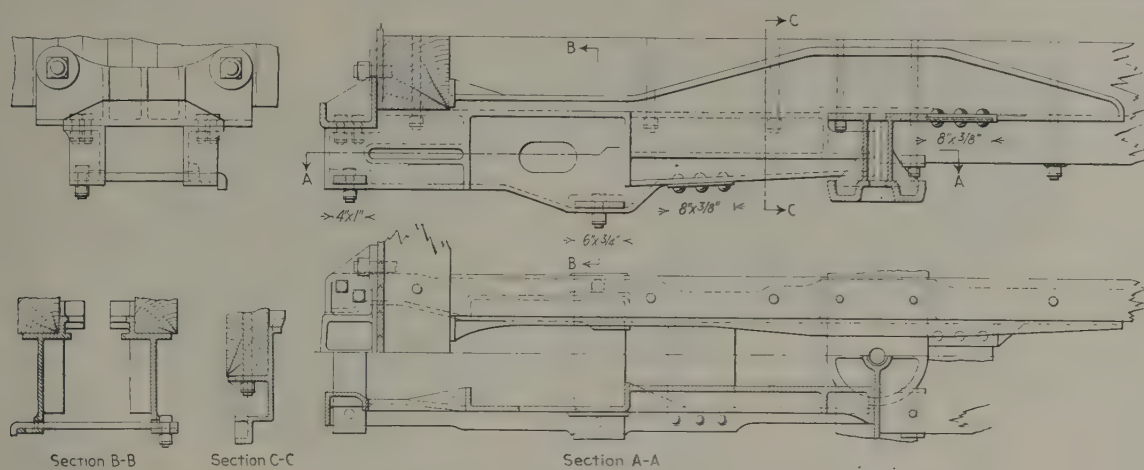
Rolled Steel Draft Arm. Elgin, Joliet & Eastern.
